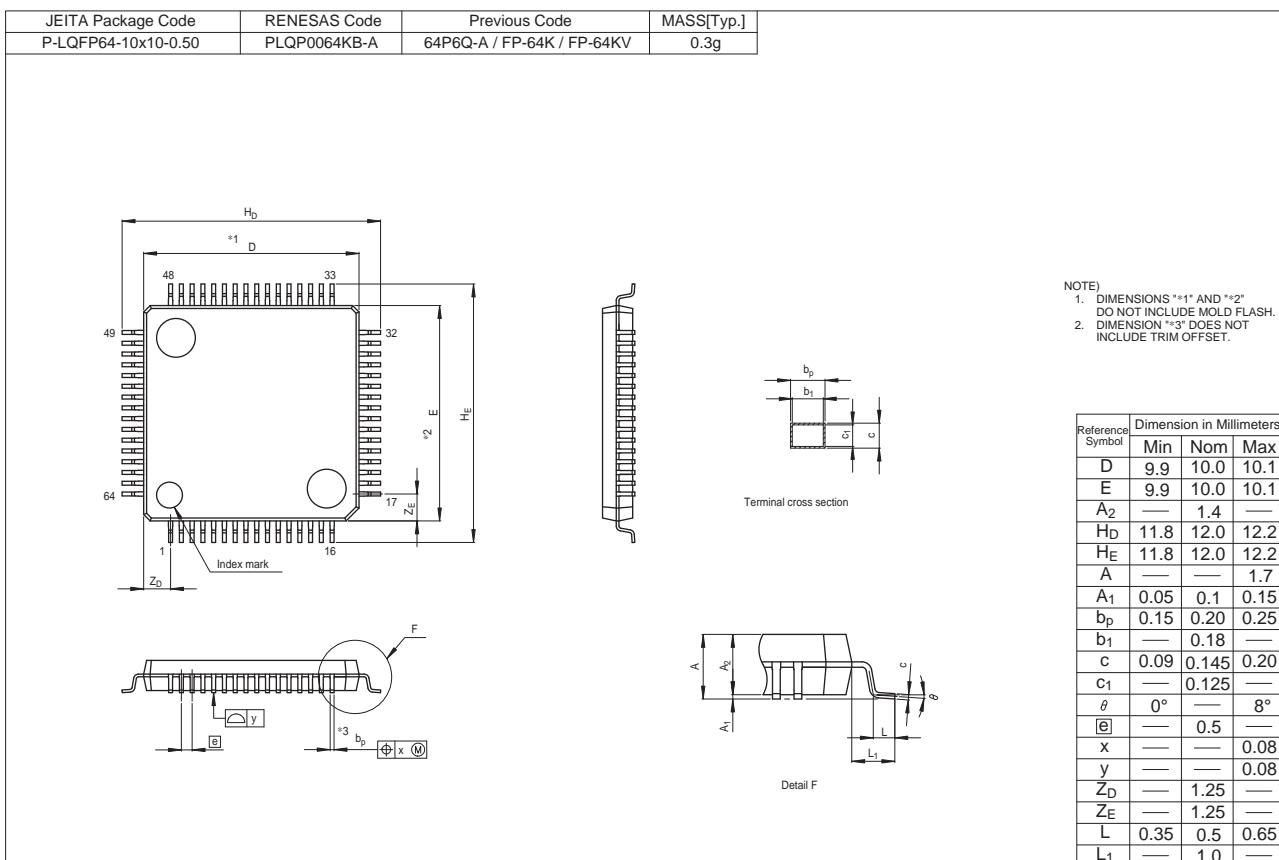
Pin LQFP (PLQP0064KB-A) Package Dimensions
